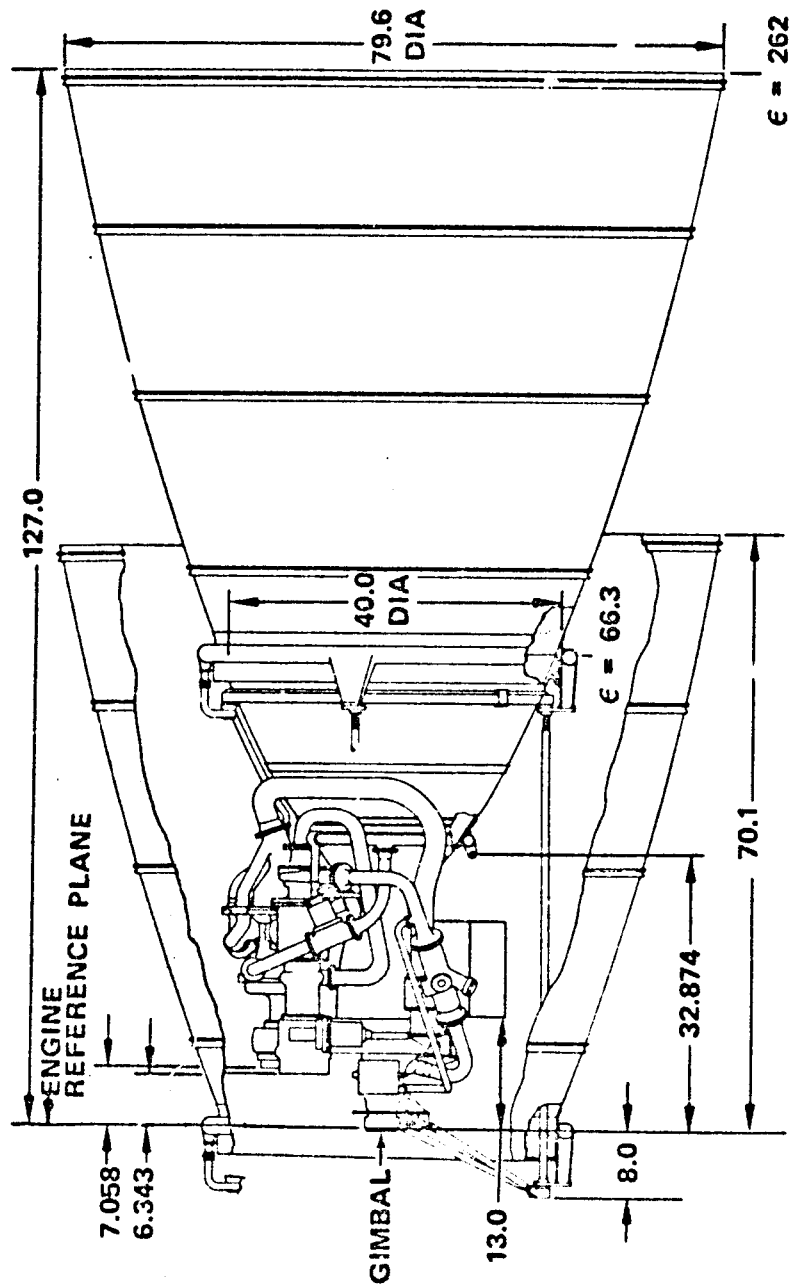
Derivative IIA Engine Installation Drawing (Sheet 1)
